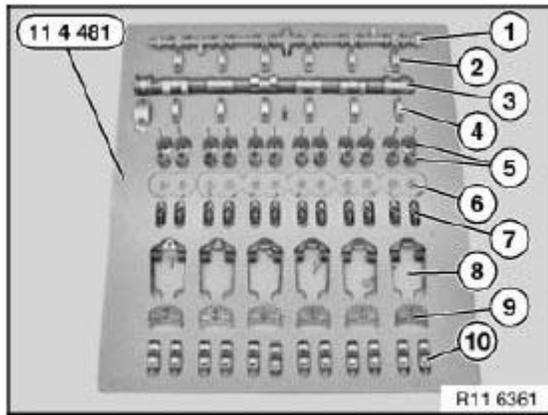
Identifying Intermediate Lever Components On Special Tool
